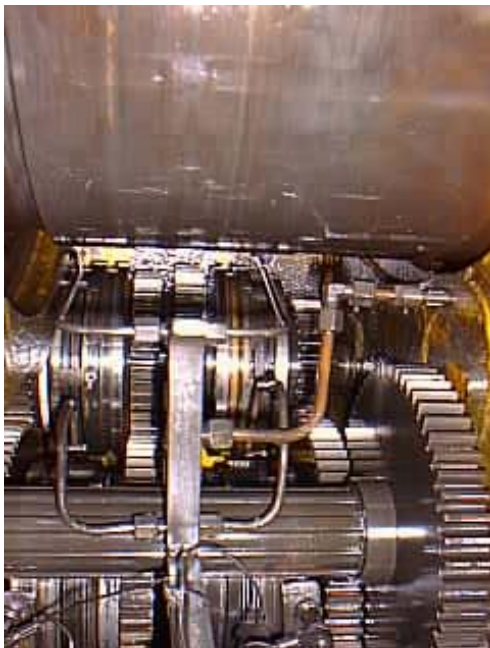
If everything is so compact packaged in a headstock, you could tell that there are machine manufacturers who have a little something to do with Ferrari!
